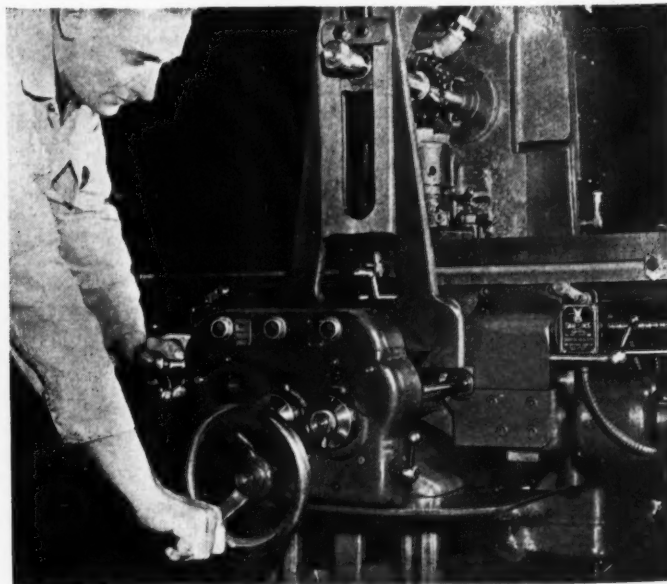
Universal Milling Machine Shown in Fig. 1 Set up for Horizontal Milling Work
